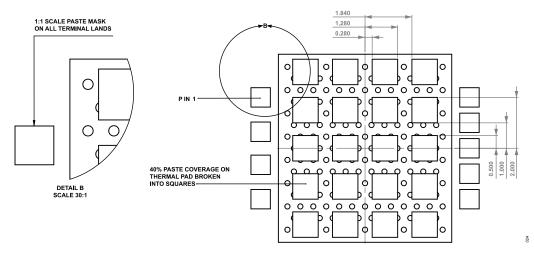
Recommended Solder Pattern (Dimensions Shown in Millimeters)
